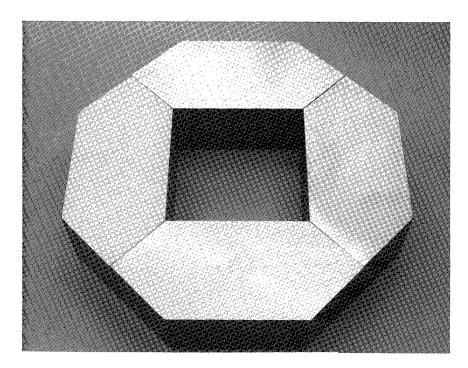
AOP Match Machined Silicon Segments by McCarter Machine
